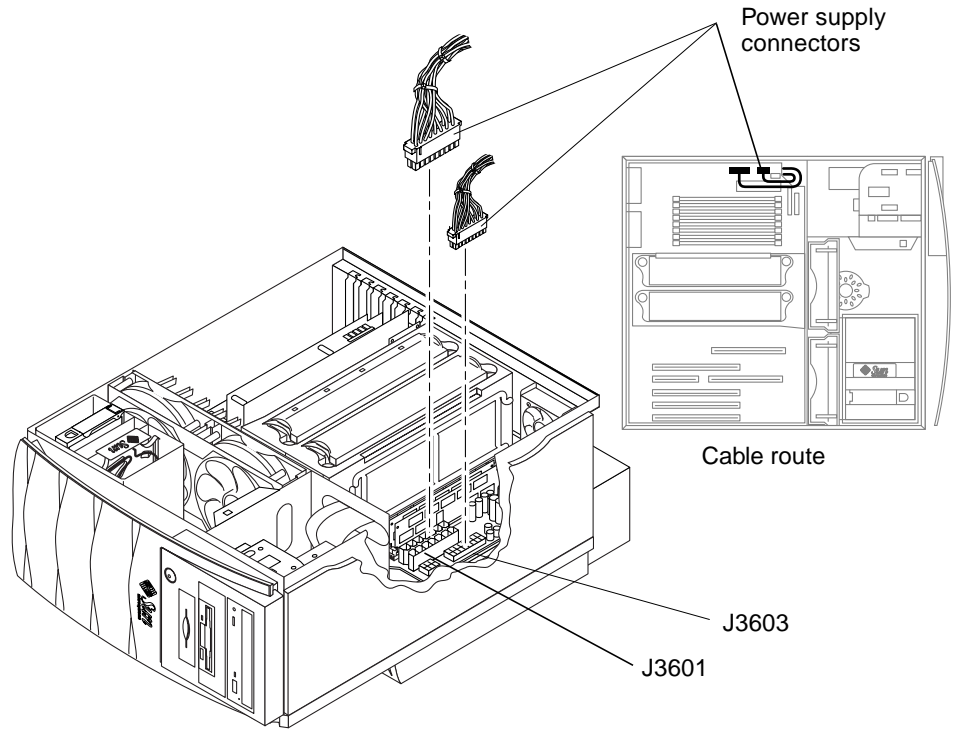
Removing and Replacing the Power Supply Assembly
